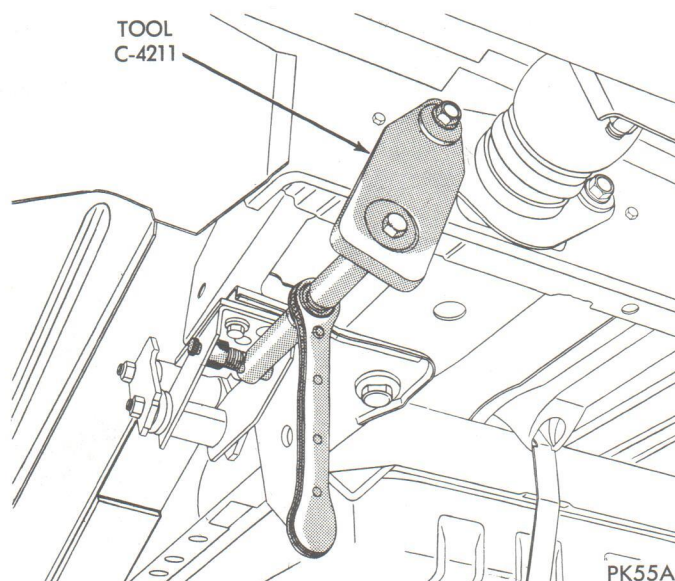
Spring Stretcher Tool in Position for Removing Rear Spring (Carline C)
